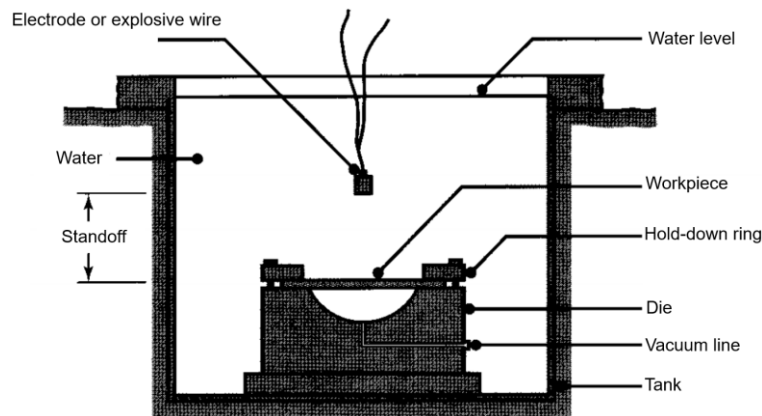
Schematic of an electro-hydraulic forming chamber with an exploded wire [42].
